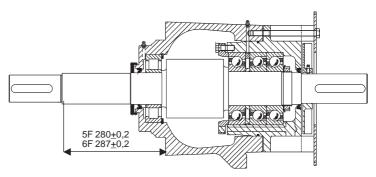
Check the shaft overhang for Bearing Assemblies 5F and 6F
